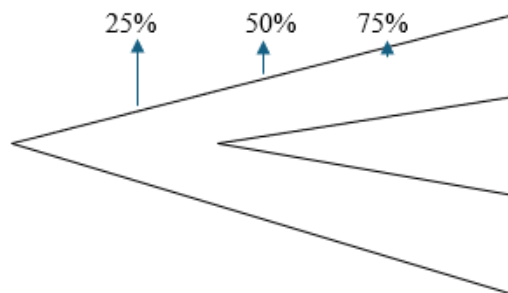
Broadhead Blade Showing Measurement Locations at 25%, 50%, and 75% of the Usable Cutting Edge (See 11.5)
